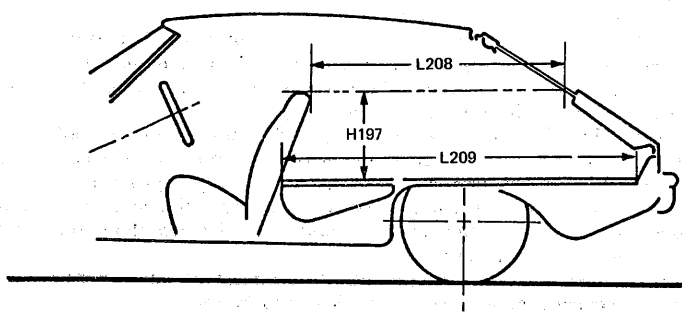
CARGO SPACE DIMENSIONS, HATCH BACK
